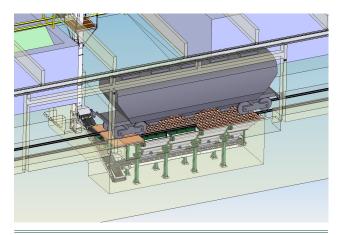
A wagon discharge pit installed at Cemagro, Finland.
